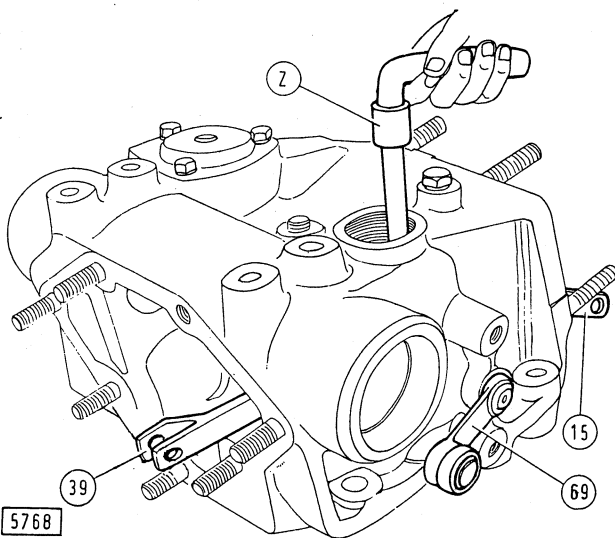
Removing the internal control leverage. Z. Box wrench for removing the screw (79, fig. VII/13). - 15. Valve spool control link. - 39. Lever connected to the internal arm. - 69. Rocker arm drive roller supporting lever.
